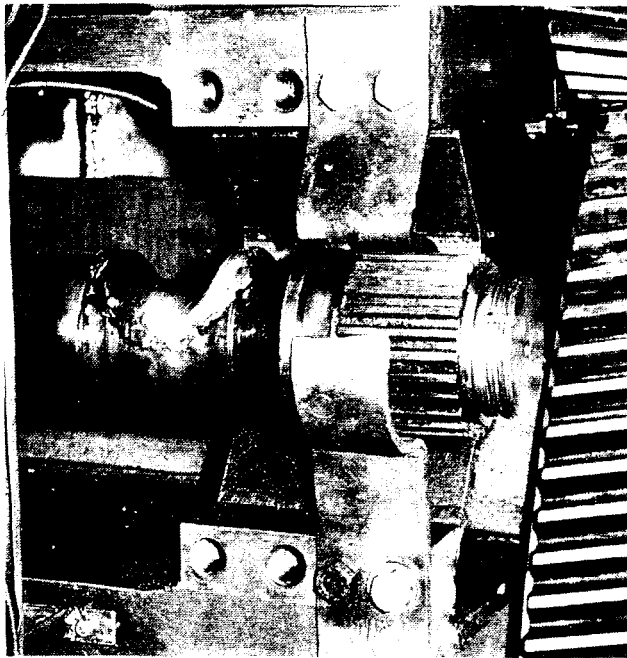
H.M.S. 'ZULU' JACKSHAFT BEARING JOURNAL
